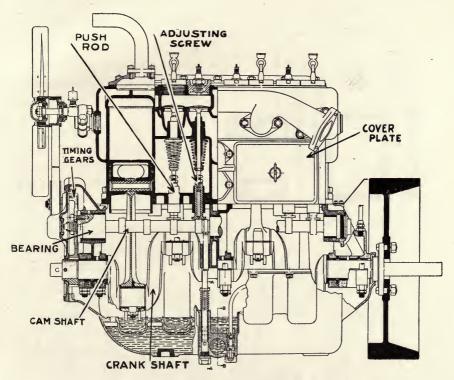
Showing Valve Mechanism of L-Head Motor.
